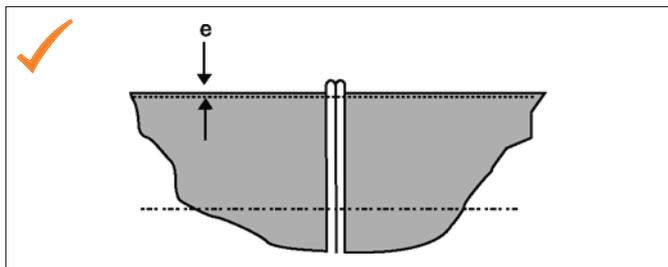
Butt-weld with even welding beads (acceptable)
